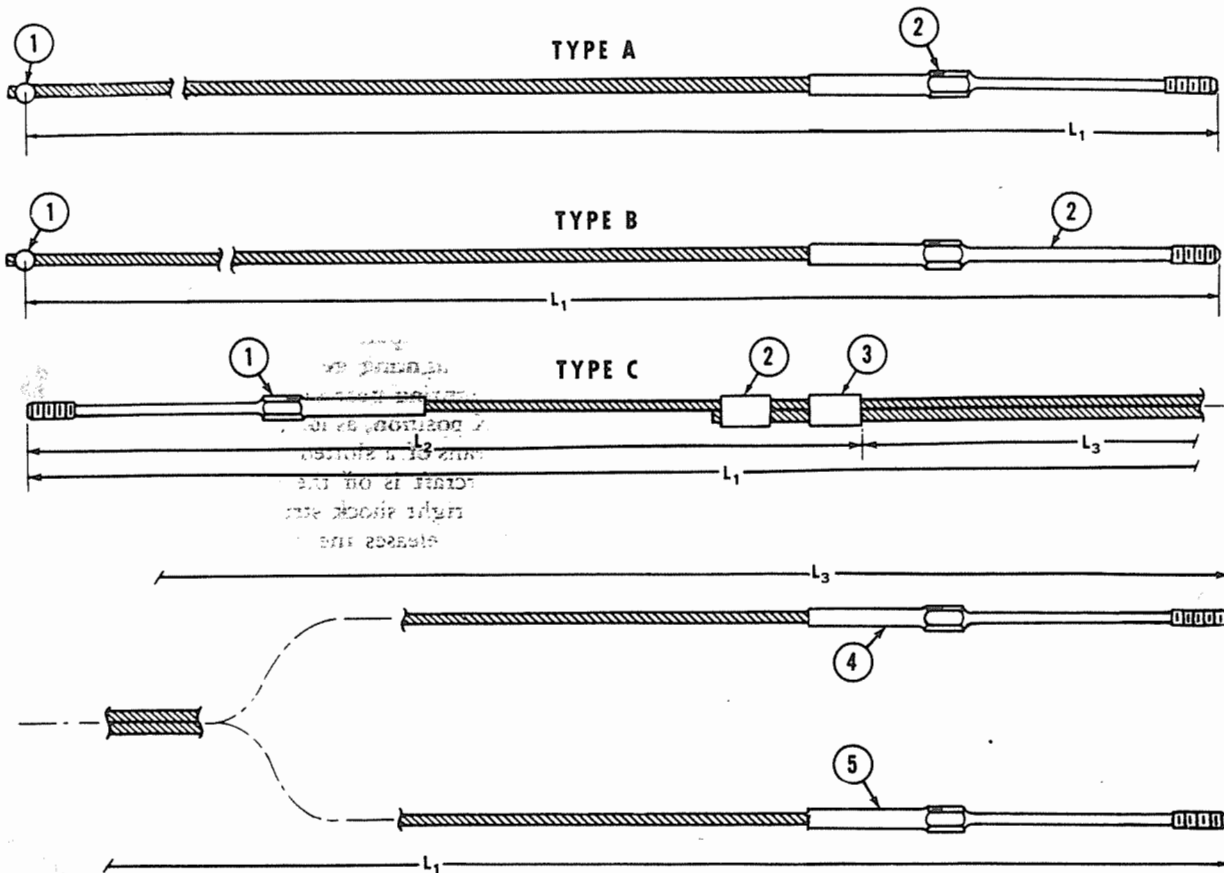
(Sheet 6 of 7 Sheet). Mechanical Safety Latch Control System – Cable Chart and Cable Assemblies
